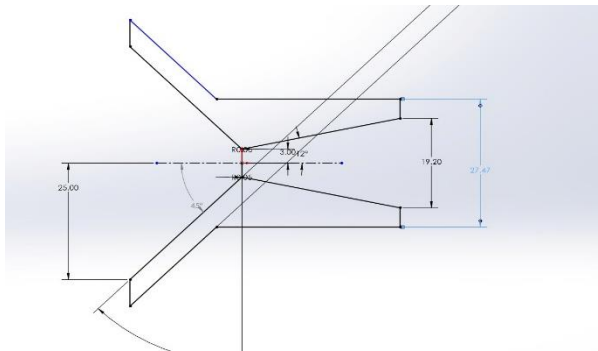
Dimensioned nozzle configuration used in the hybrid rocket motor
